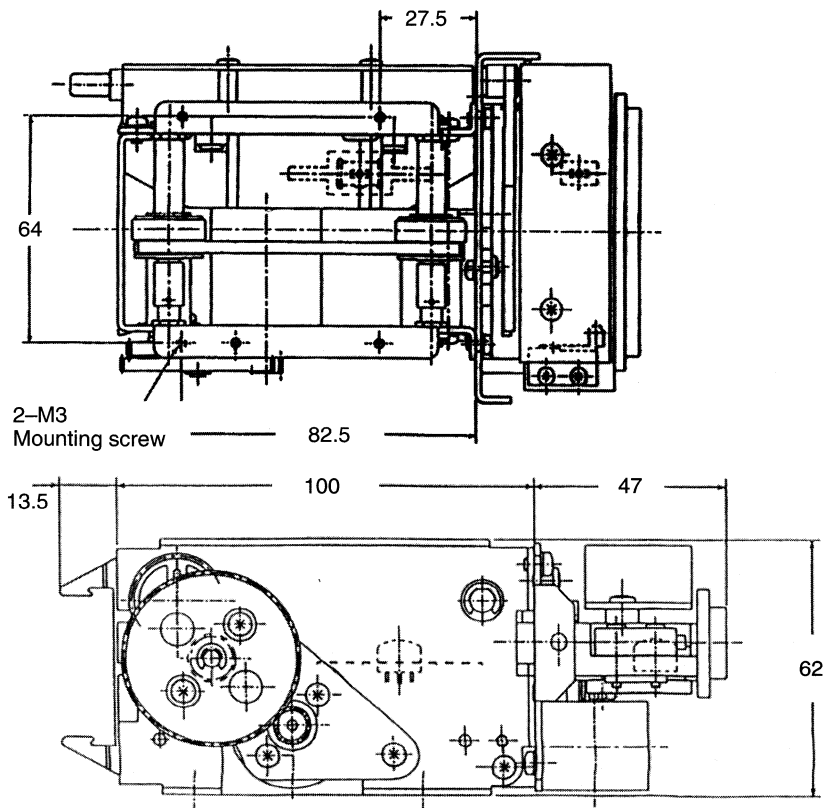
Dimensional Outline Drawing (with shutter unit)
